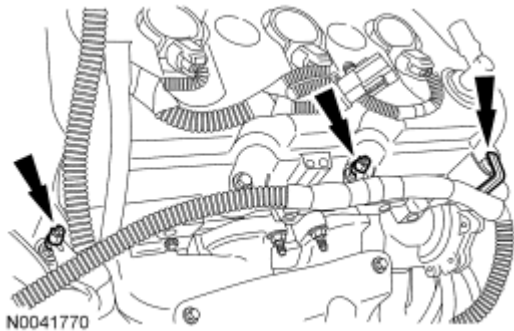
Locating Wiring Harness Retainers From Valve Cover Stud Bolts
